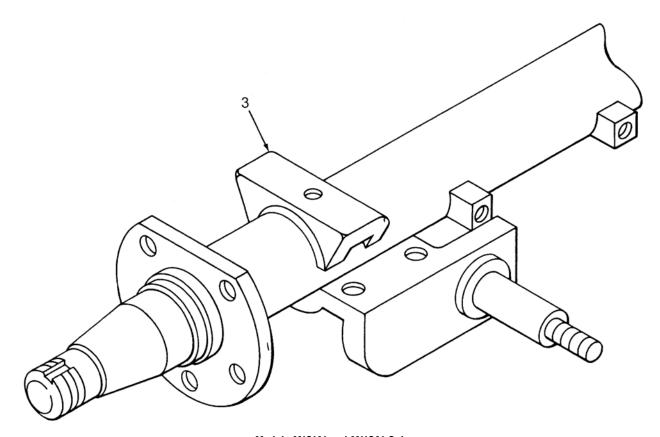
Rear Axle Assembly (Sheet 1 of 2)
